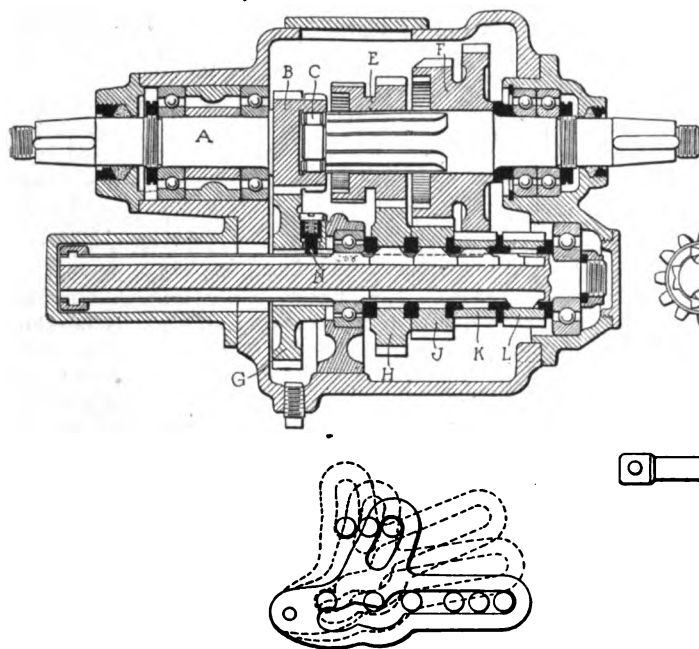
Cross-sectional view of the four-speed Campbell gearset, with details of layshaft gears, cam plate and shifting mechanism
